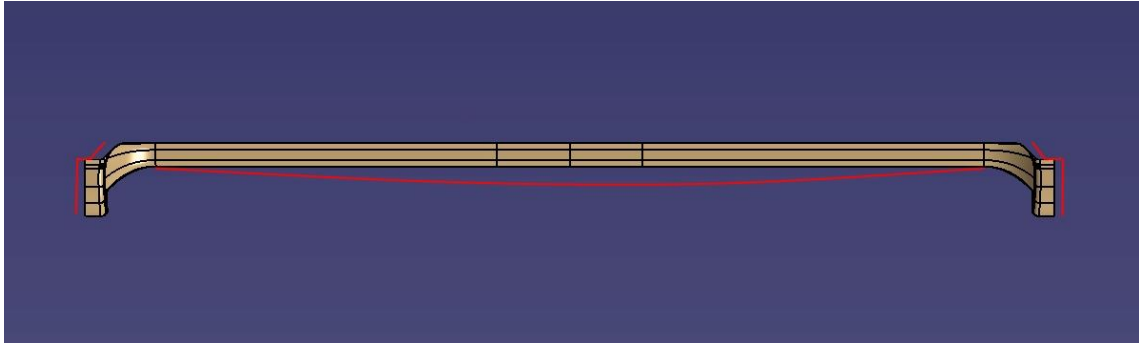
A split view of a floor beam, red lines illustrating the deformations (not in scale)
